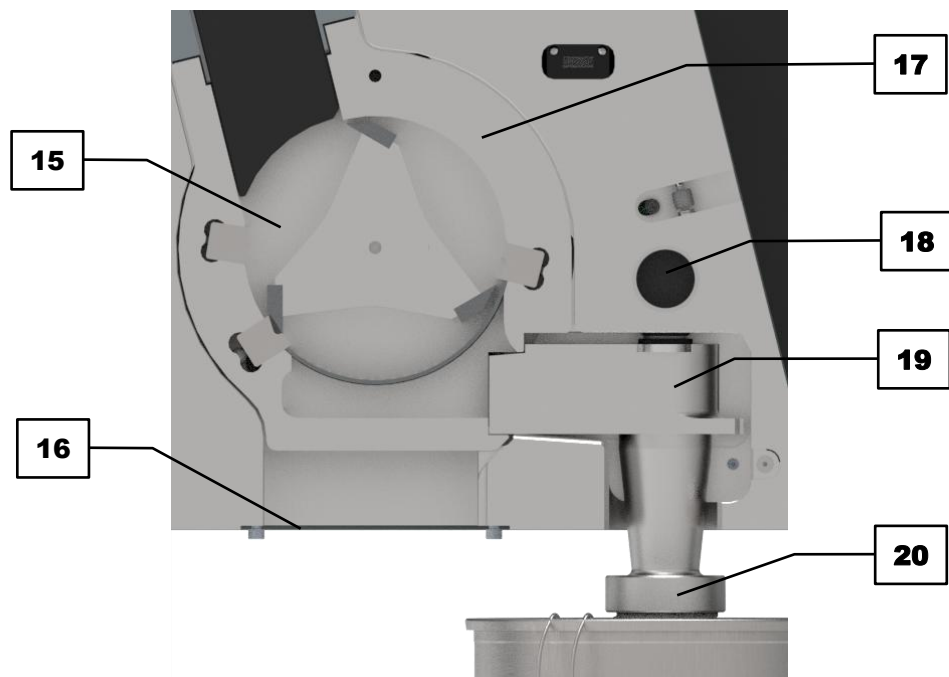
Detailed view of the grinding chamber insert with cyclone outlet
